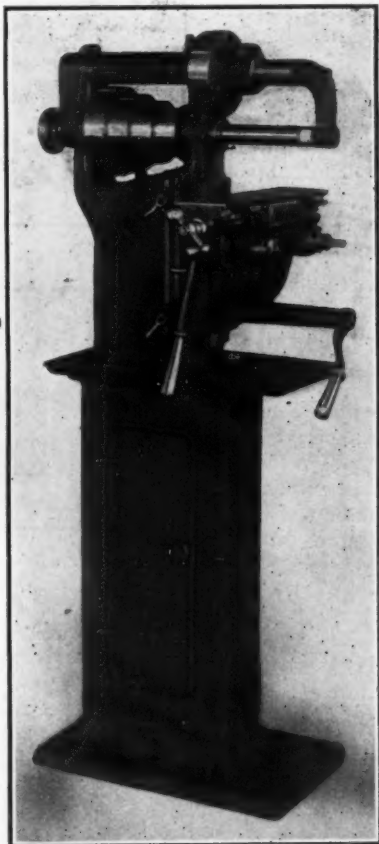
The New Hand Milling Machine Built by the National Machine & Tool Works, Rockford, Ill., Arranged for Horizontal Milling.
